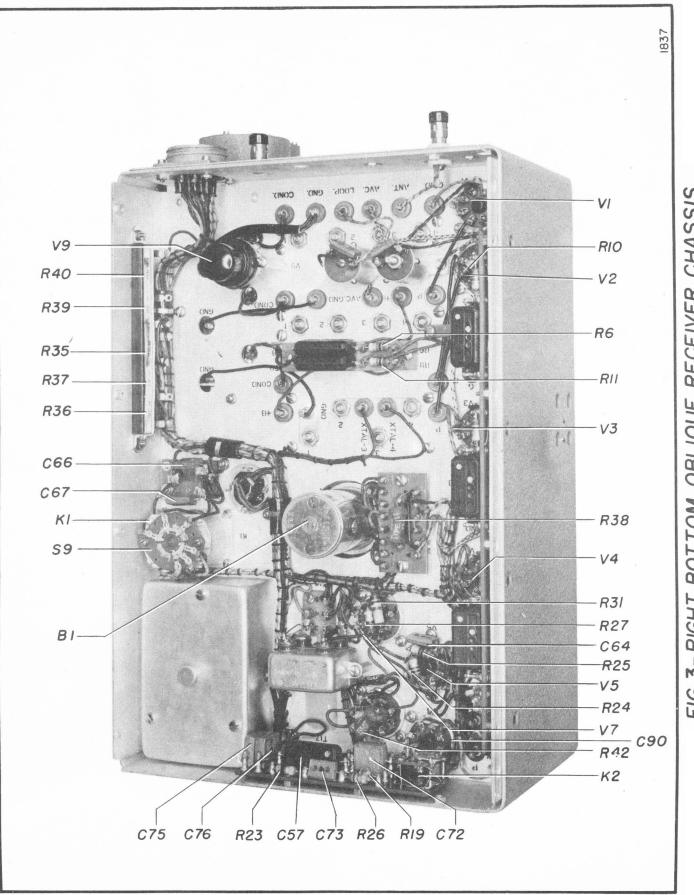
RIGHT BOTTOM OBLIQUE, RECEIVER CHASSIS
